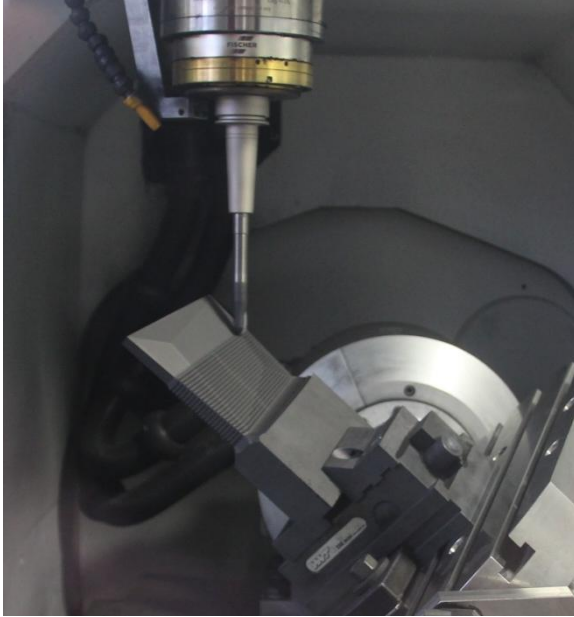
Milling of graphite tiles on a 5-axis machining center in a dry process.
